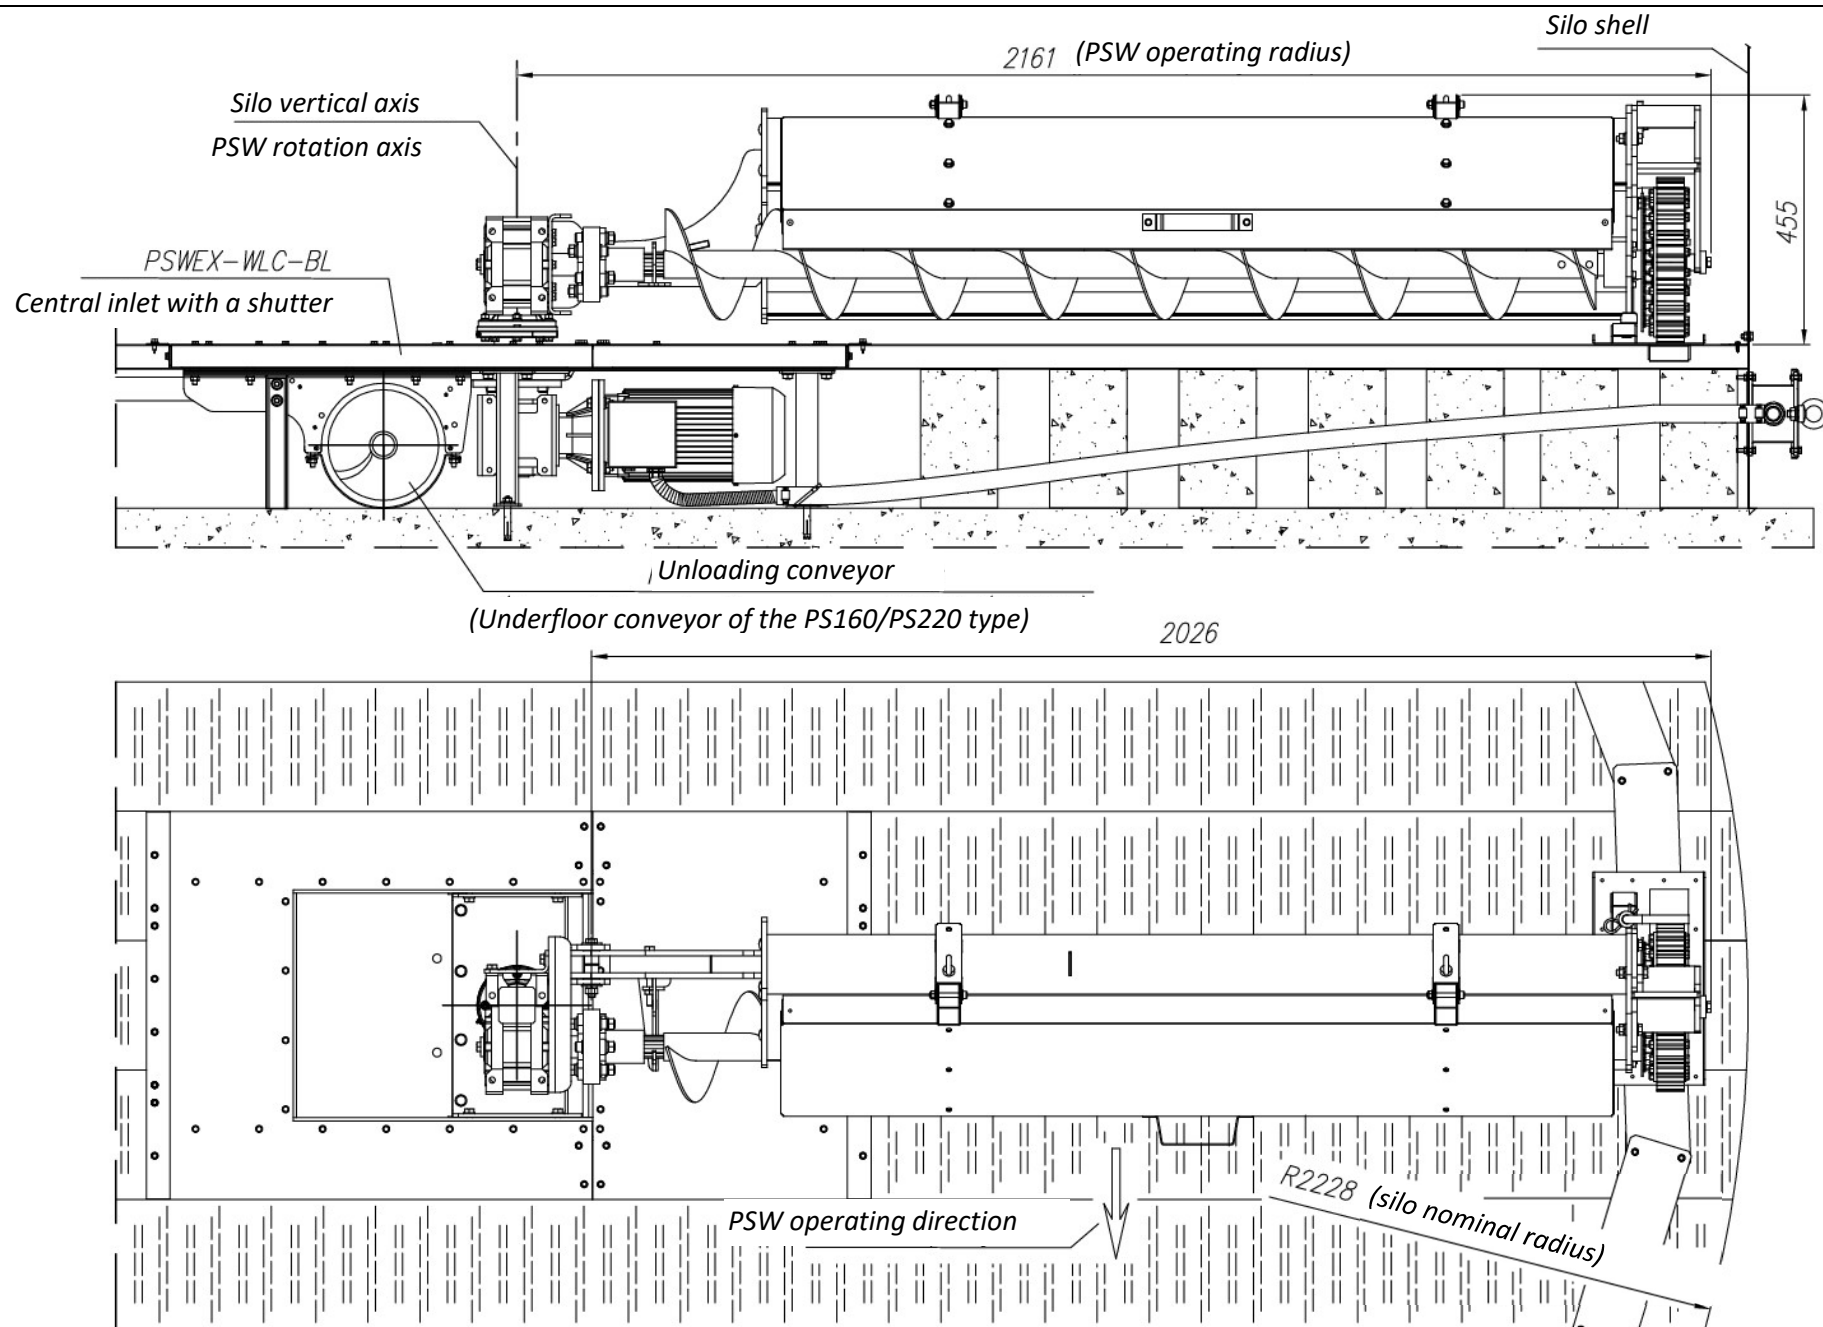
Basic installation dimensions of the internal screw conveyor, of the PSWEX-5 type (dimensions as mm).
